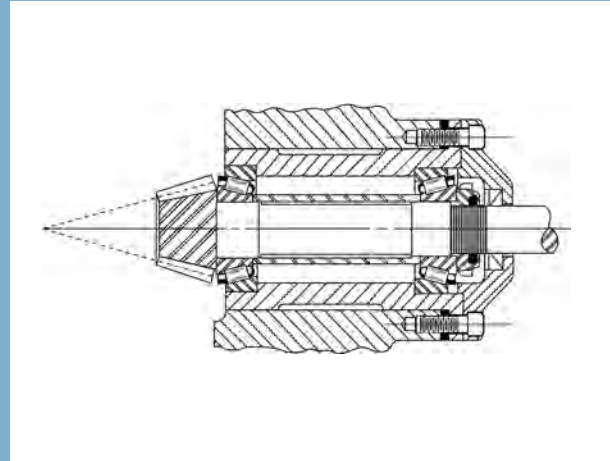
This mounting is another form of bearing arrangement for overhung pinions.
